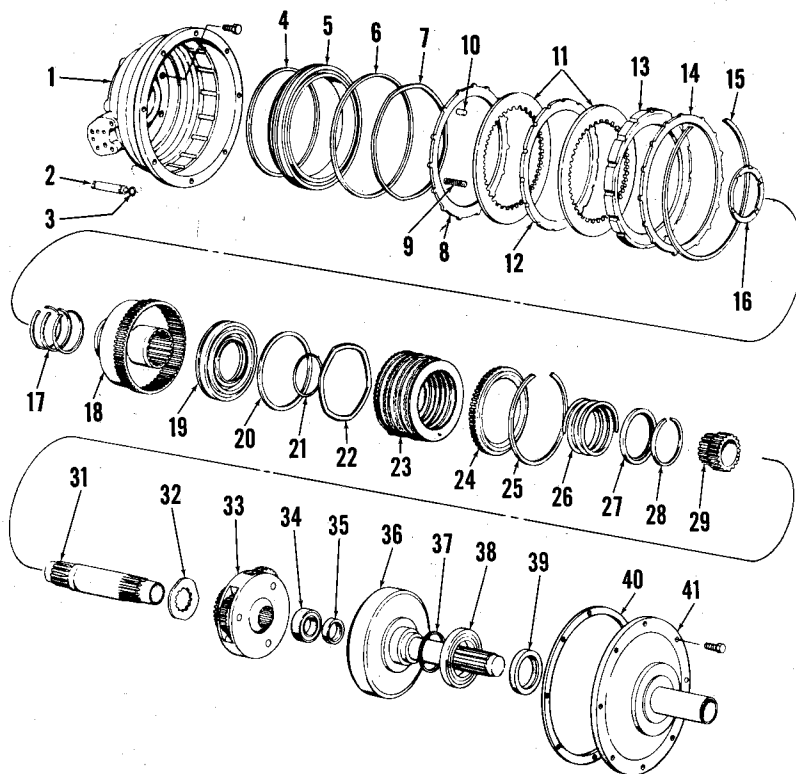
Exploded view of Dual Power assembly. Refer to Fig. 141 for view of direct drive clutch pack assembly. Note: clutch feathering spring (22) deleted in Nov., 1979.
